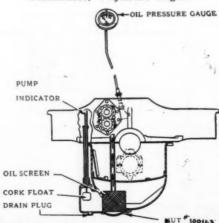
Another view of Fig. 5 showing the location and arrangement of oil pump
